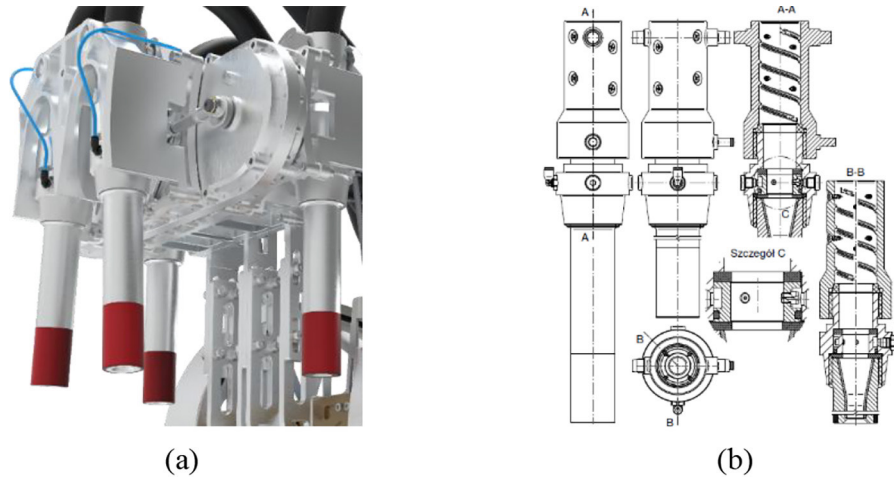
Cleaning module of the magnetic robot: (a) four abrasive blasting nozzles with spray heads; (b) single abrasive blasting nozzle combined with a spray head
